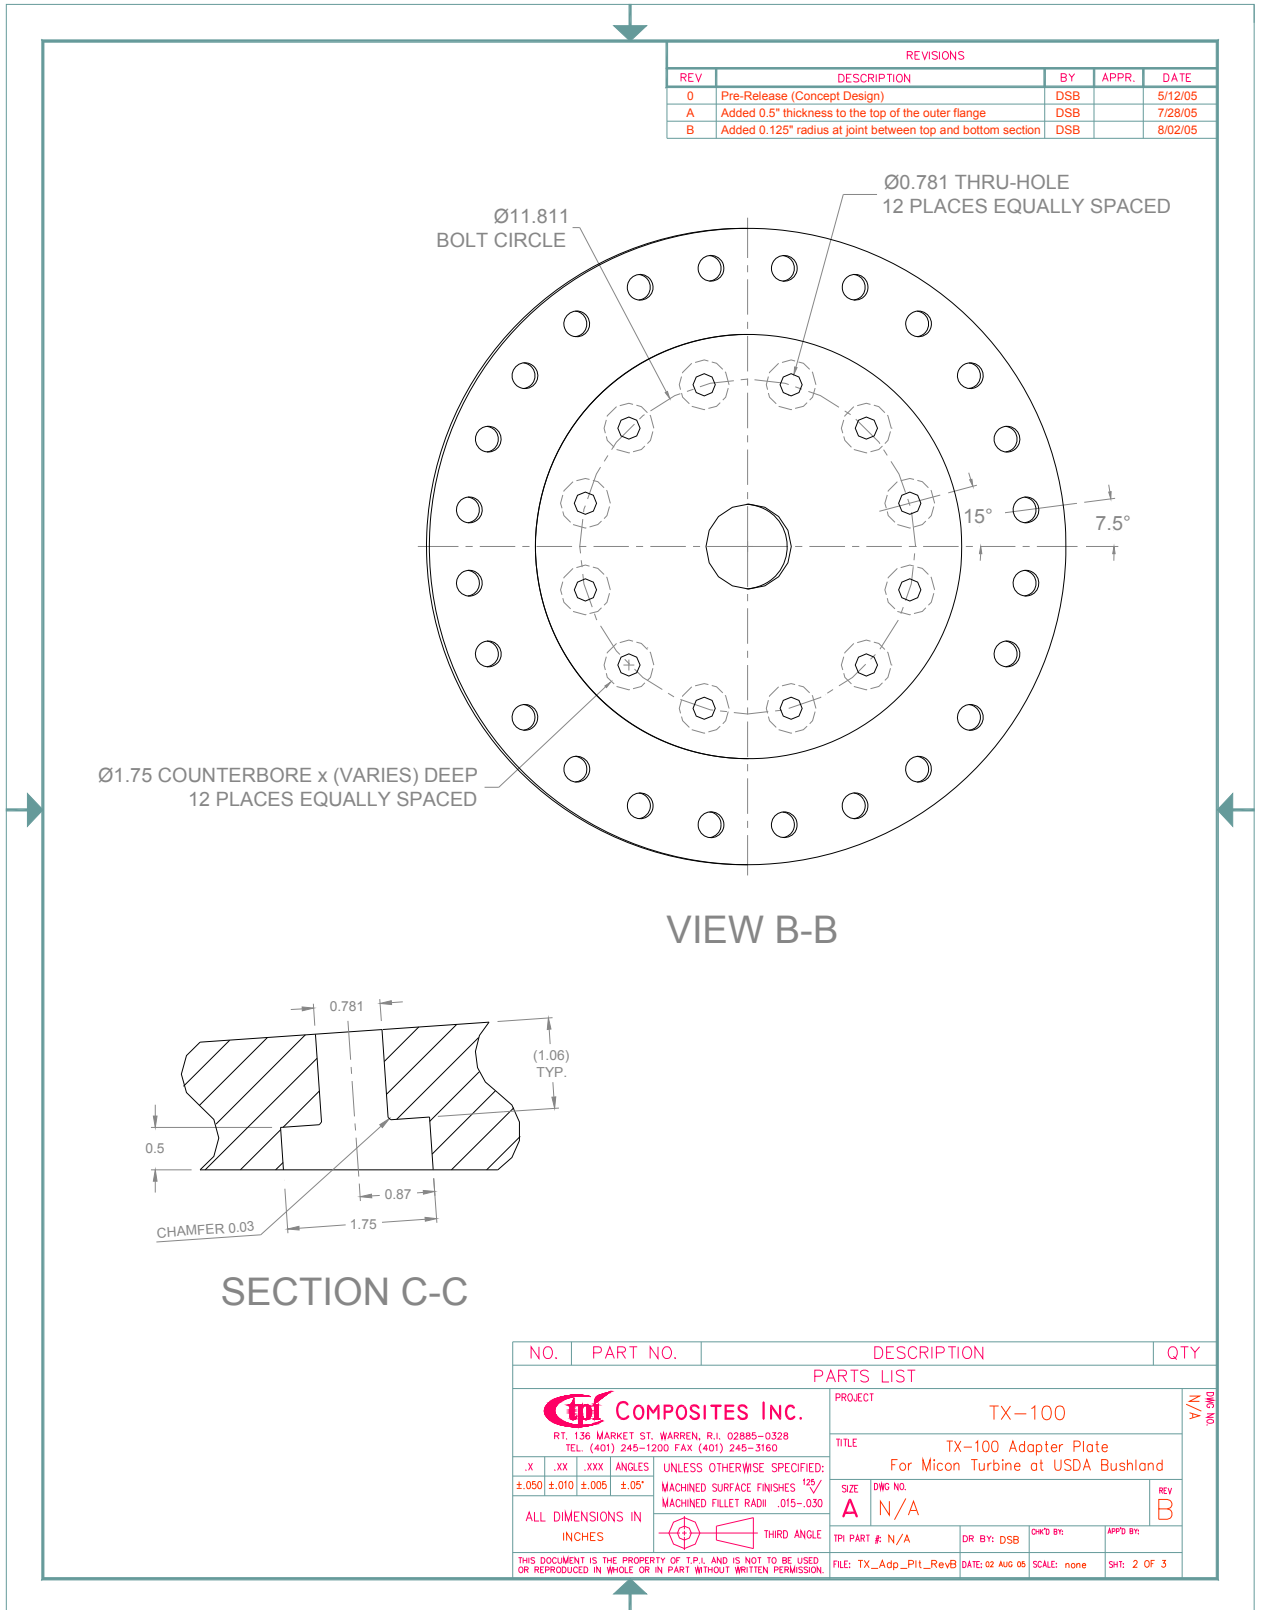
TX-100 Adapter Plate – Manufacturing Drawing (2)
